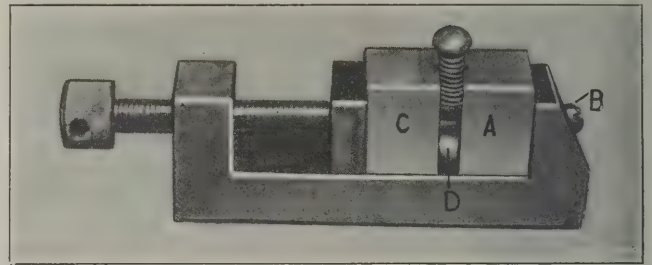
Small Machine Vise, made by adding Jaws to a Toolmaker's Clamp
